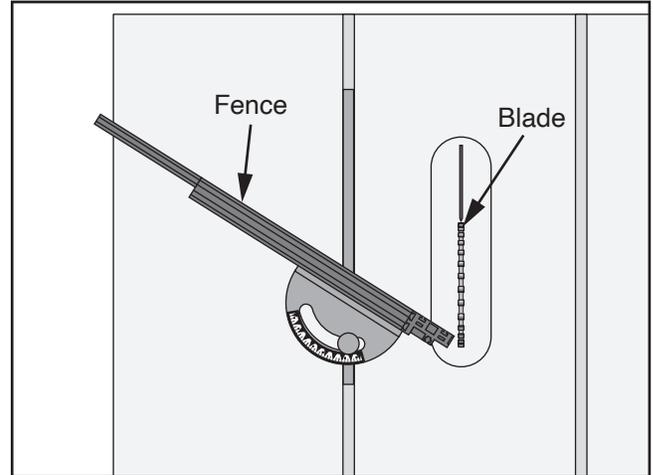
Checking for blade clearance (blade guard removed for clarity).
